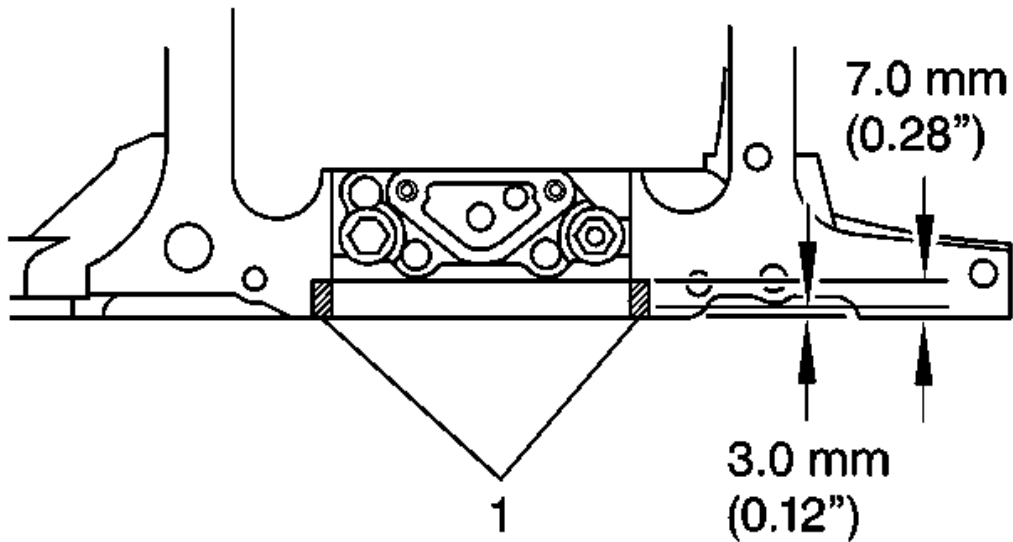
View Of Crankshaft Rear Main Bearing Cap
